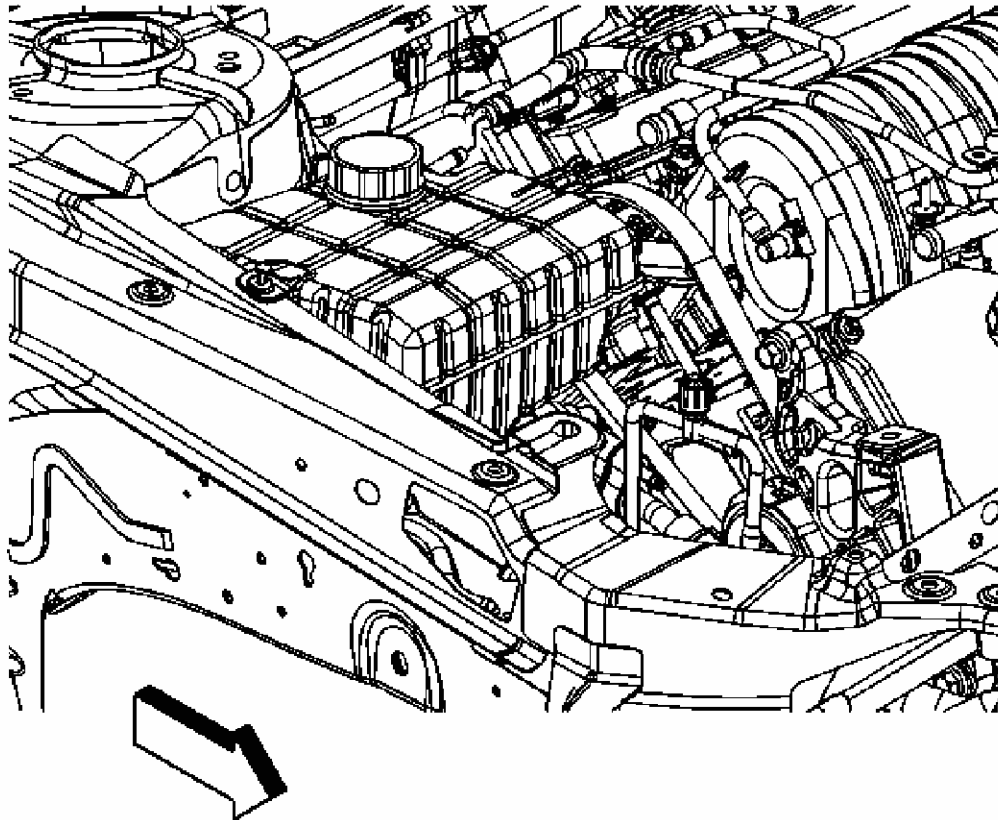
Identifying Surge Tank Inlet Hose/Pipe
